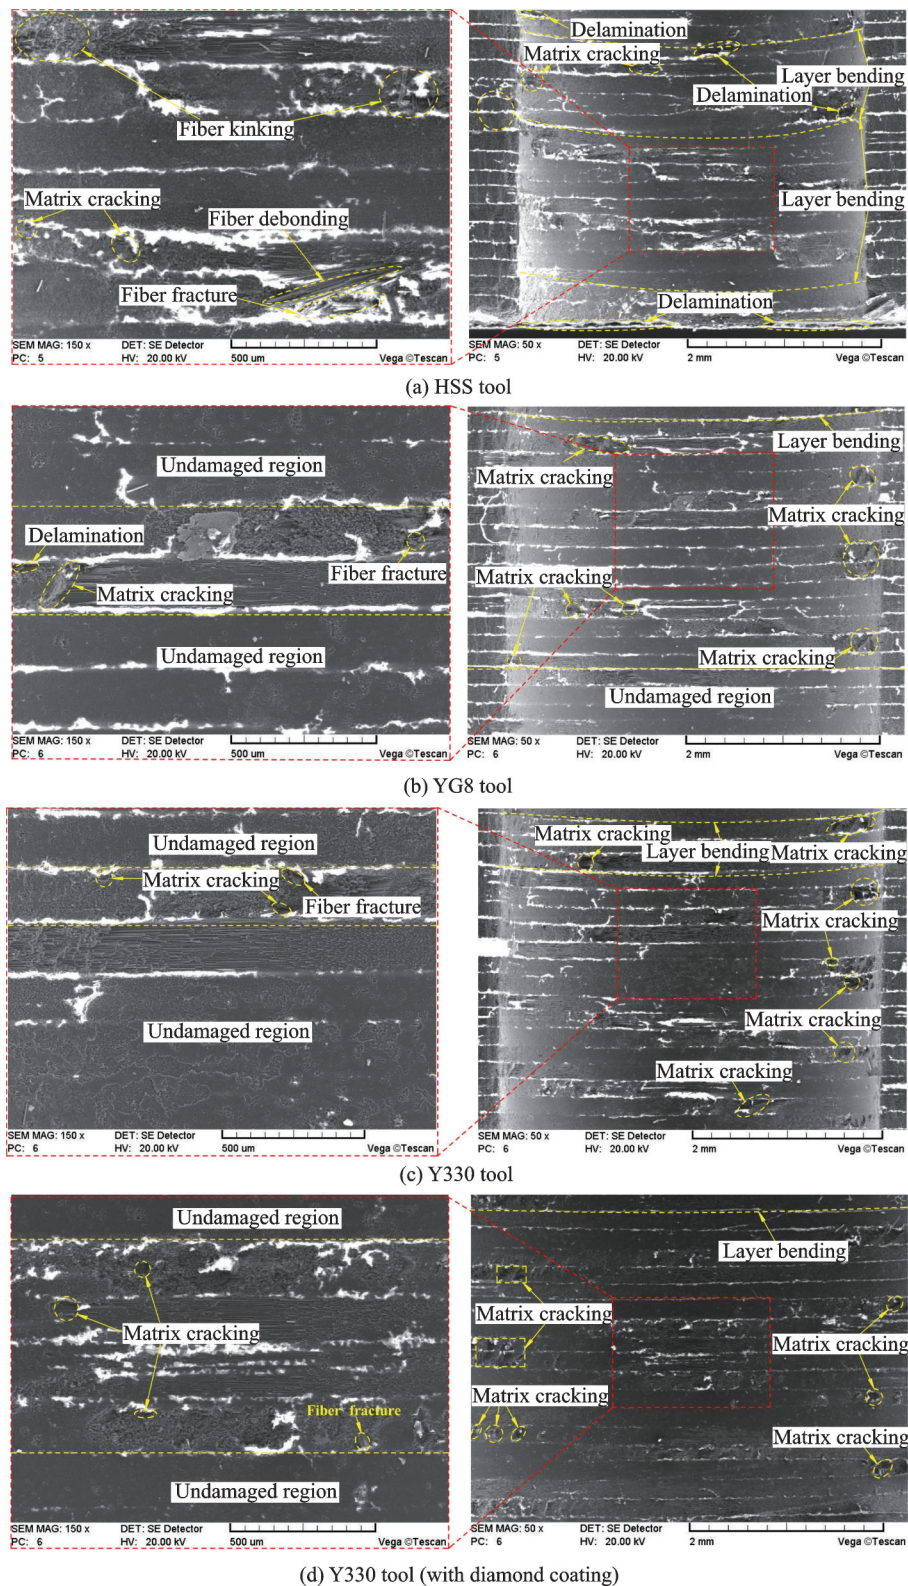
Hole wall surface damages of workpieces drilled by different tools under SEM at 6 900 r/min spindle speed and 0.01 mm/r feed speed
